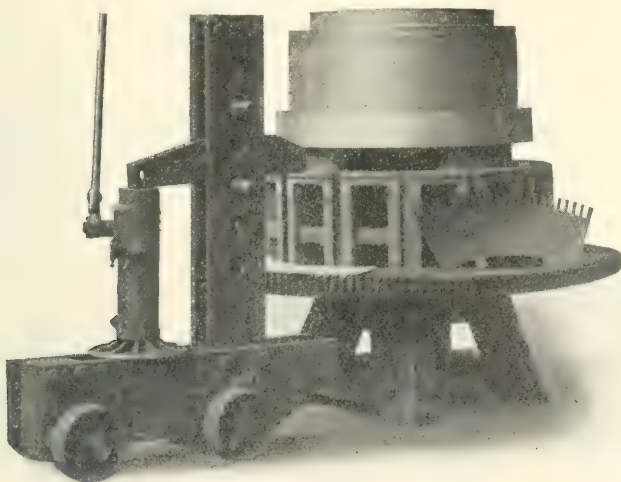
ARMATURE CORE, PARTLY ASSEMBLED
